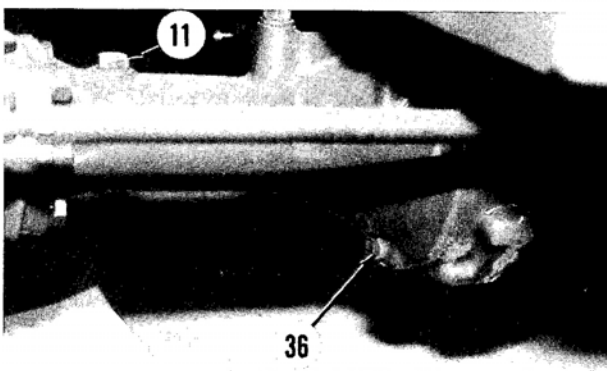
Note location of front-axle drain plug (36) and fill plug (11) used on Model B7100HST-D.
